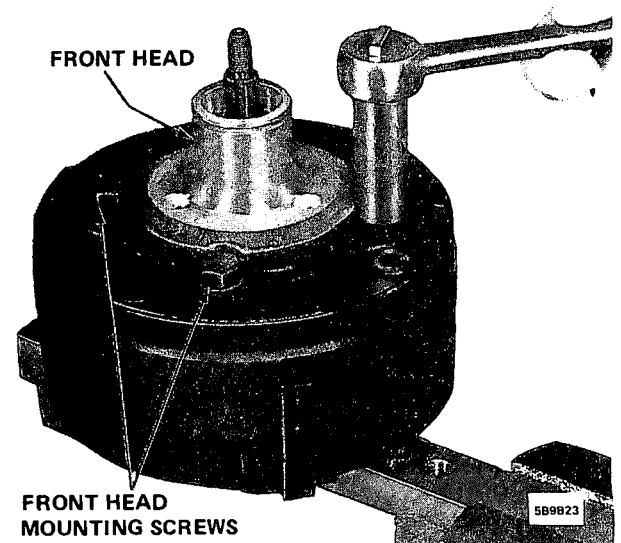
B-47 - Removing the Front Head Mounting Screws - 4 Cylinder Compressor
